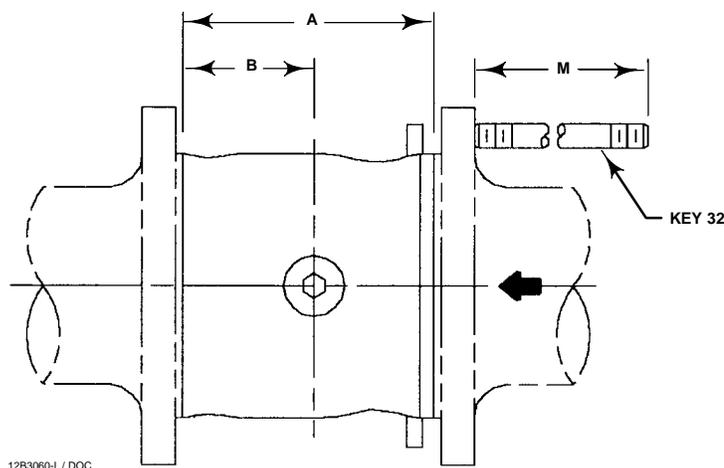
Design V200 Dimensions and Required Clearances for Installation
